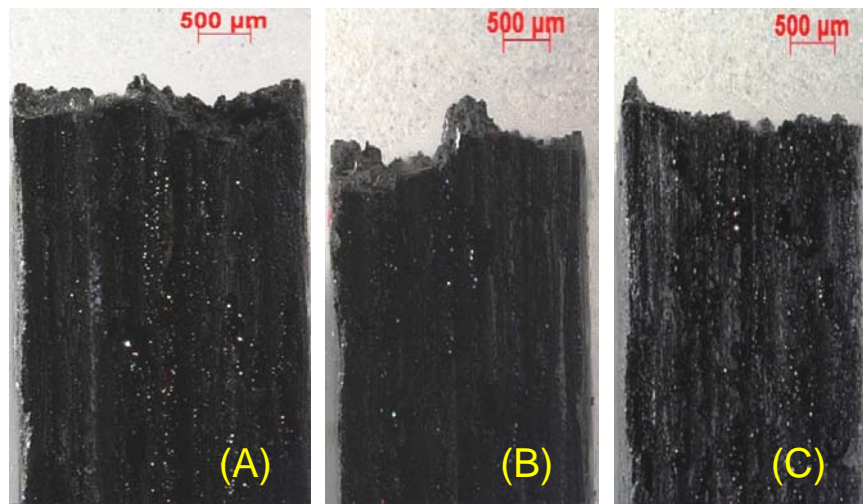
Fracture surfaces of composite C1 specimens obtained in fatigue testing in air at 1300 °C, Maximum Fatigue Stress Level: 140 MPa (A), 120 MPa (B), and 100 MPa (C).
